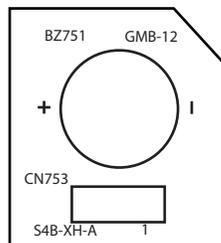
Audible Alarm PCB Assembly (CPWBN105.A)
